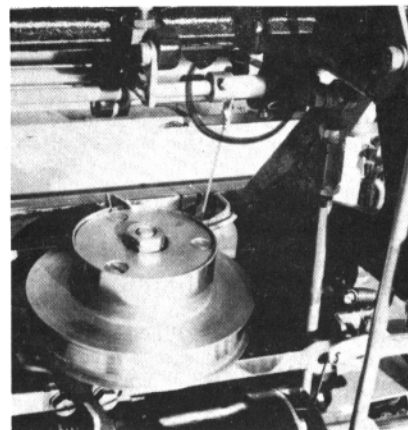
Photo showing the solder joint on the line feed push bar from the attached wire.
